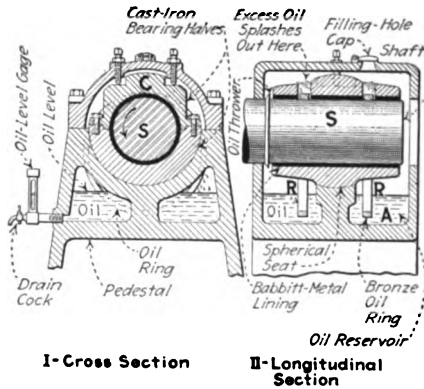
Typical ring-oiled bearing. (The spherical seat makes the bearing self-aligning.)
